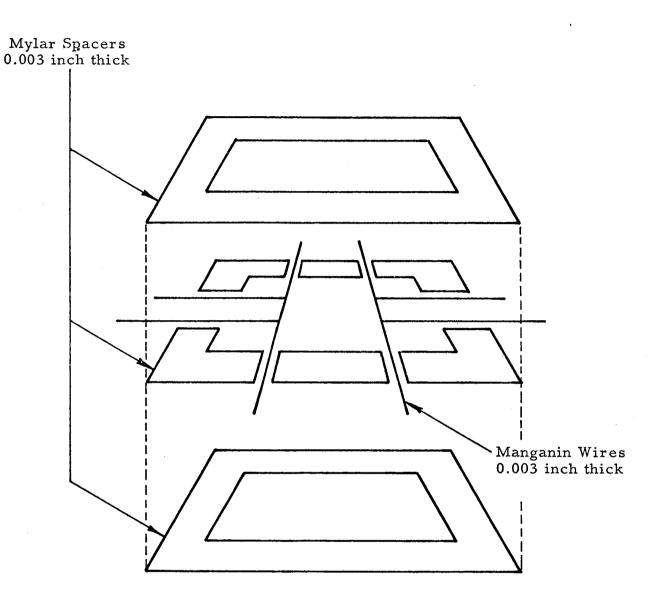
EXPLODED SCHEMATIC DIAGRAM OF PARTS OF MANGANIN GAUGE ASSEMBLY
